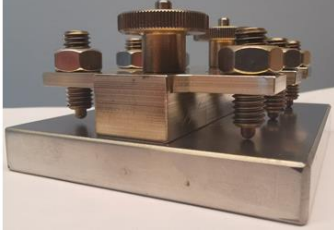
Bonding jig with spring loaded pins for setting the bonding pressure.
